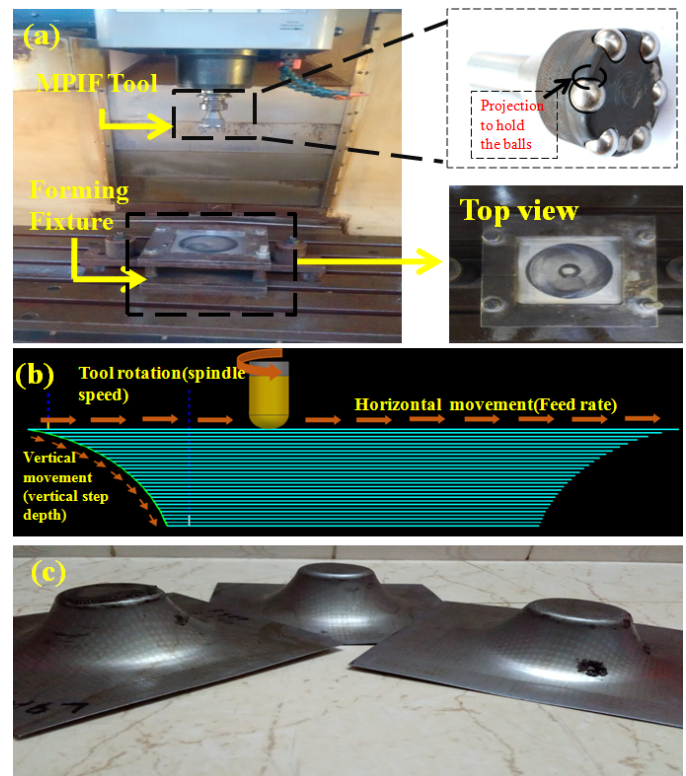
Setup used for forming process: (a) Vertical milling machine used, (b) Tool movements with respect to various input parameters and (c) Sample sheets formed
